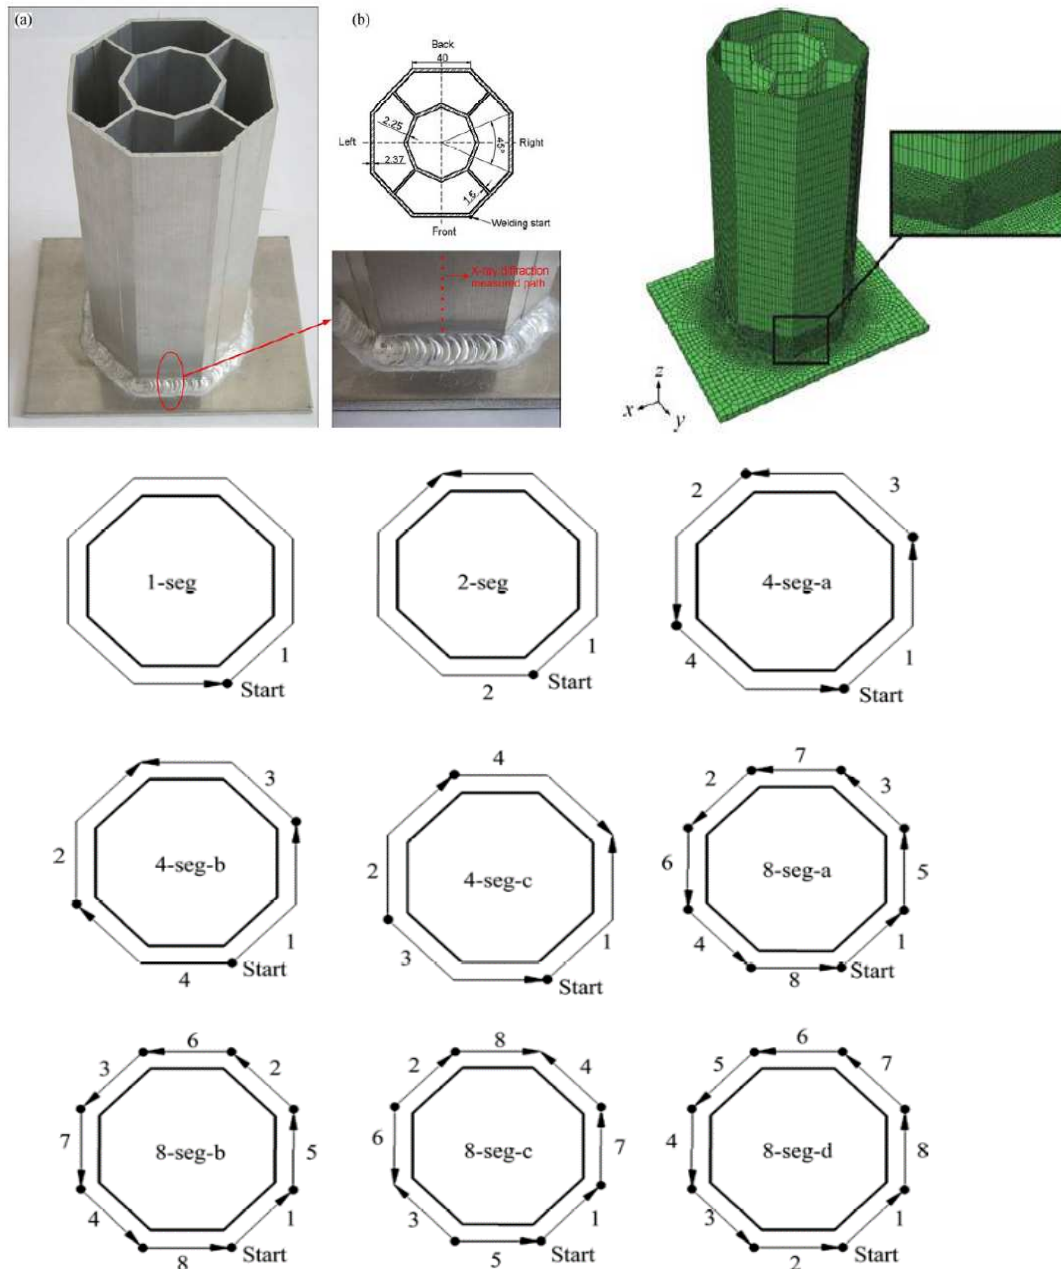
Geometry, finite element mesh and welding sequences [86].
